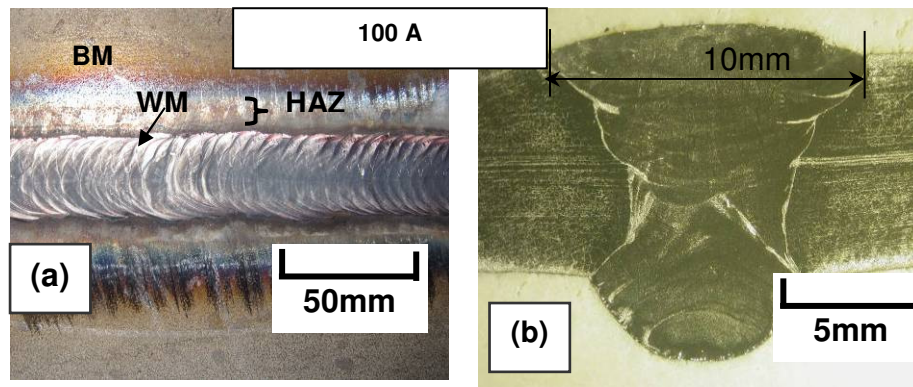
Photograph of face side (a) and macrograph of a cross section (b) of GTA butt welded joint produced using 100A welding current, 13V welding voltage, 135mm/min welding speed, 15 l/min argon shielding and 0.05% oxygen in purging gas.
